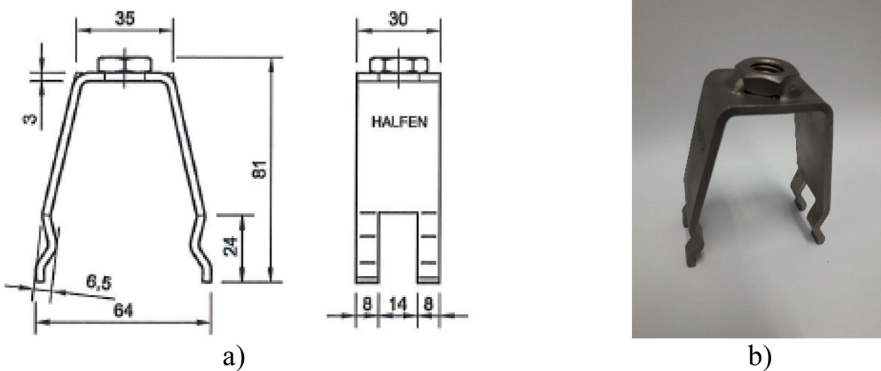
a) Dimension of fastening element (DIBt 2018), b) Picture of fastening element
